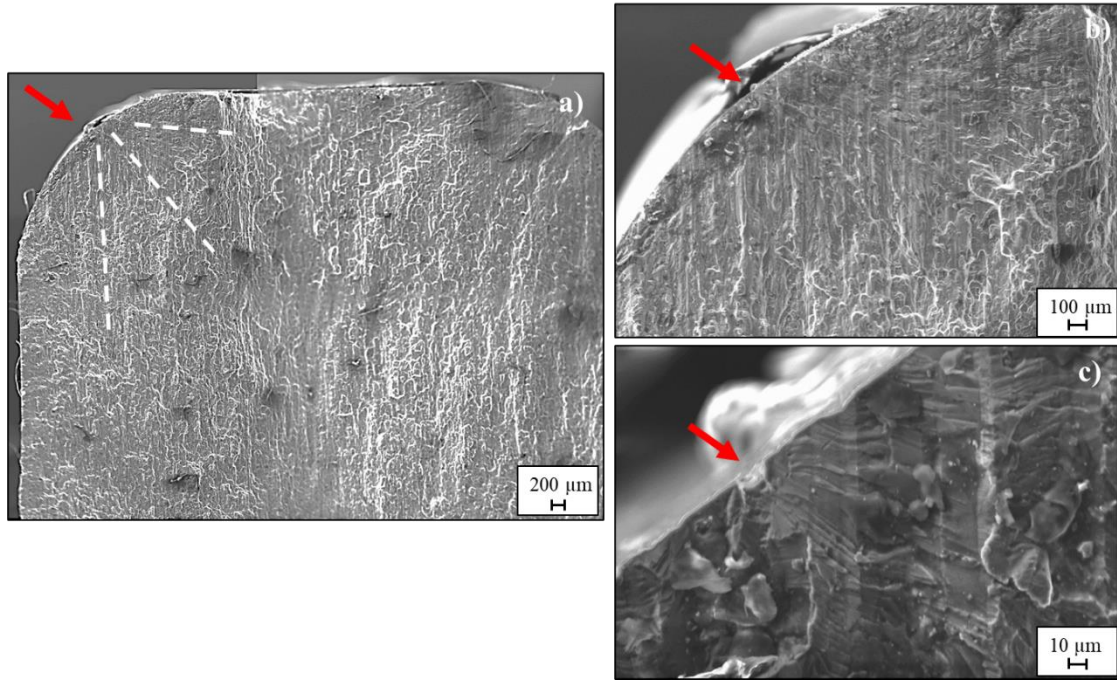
Fracture surface of As M.+TSA component at different magnifications: a) overall view of the fracture surface; b) location of the crack nucleation site; c) semicircular-shaped defect inducing fatigue crack nucleation.
